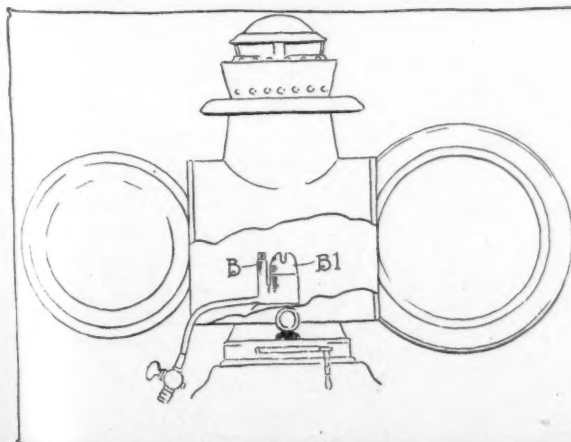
HAM'S OIL-ACETYLENE BURNER
